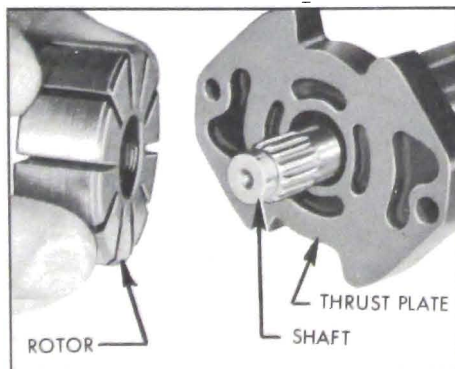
Assembling Shaft to Thrust Plate and Rotor
